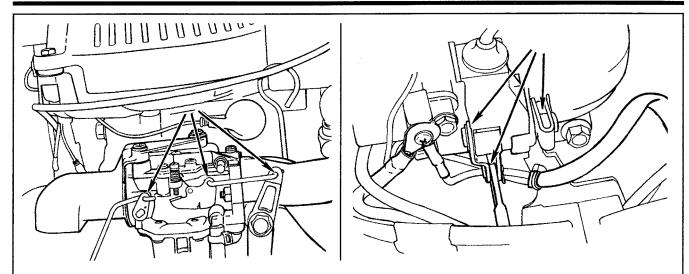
Carburetor, choke and throttle linkage (left) and shift lever shaft and detent (right) lubrication - 8/9.9 hp (211cc) 4-stroke motors
